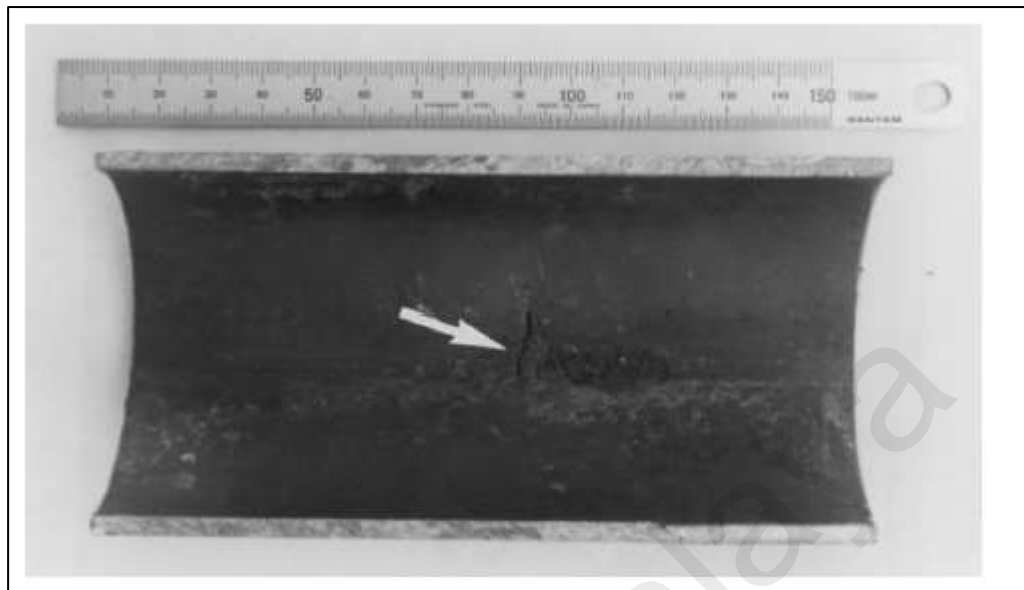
Internal Surface Pitting & Cracking
